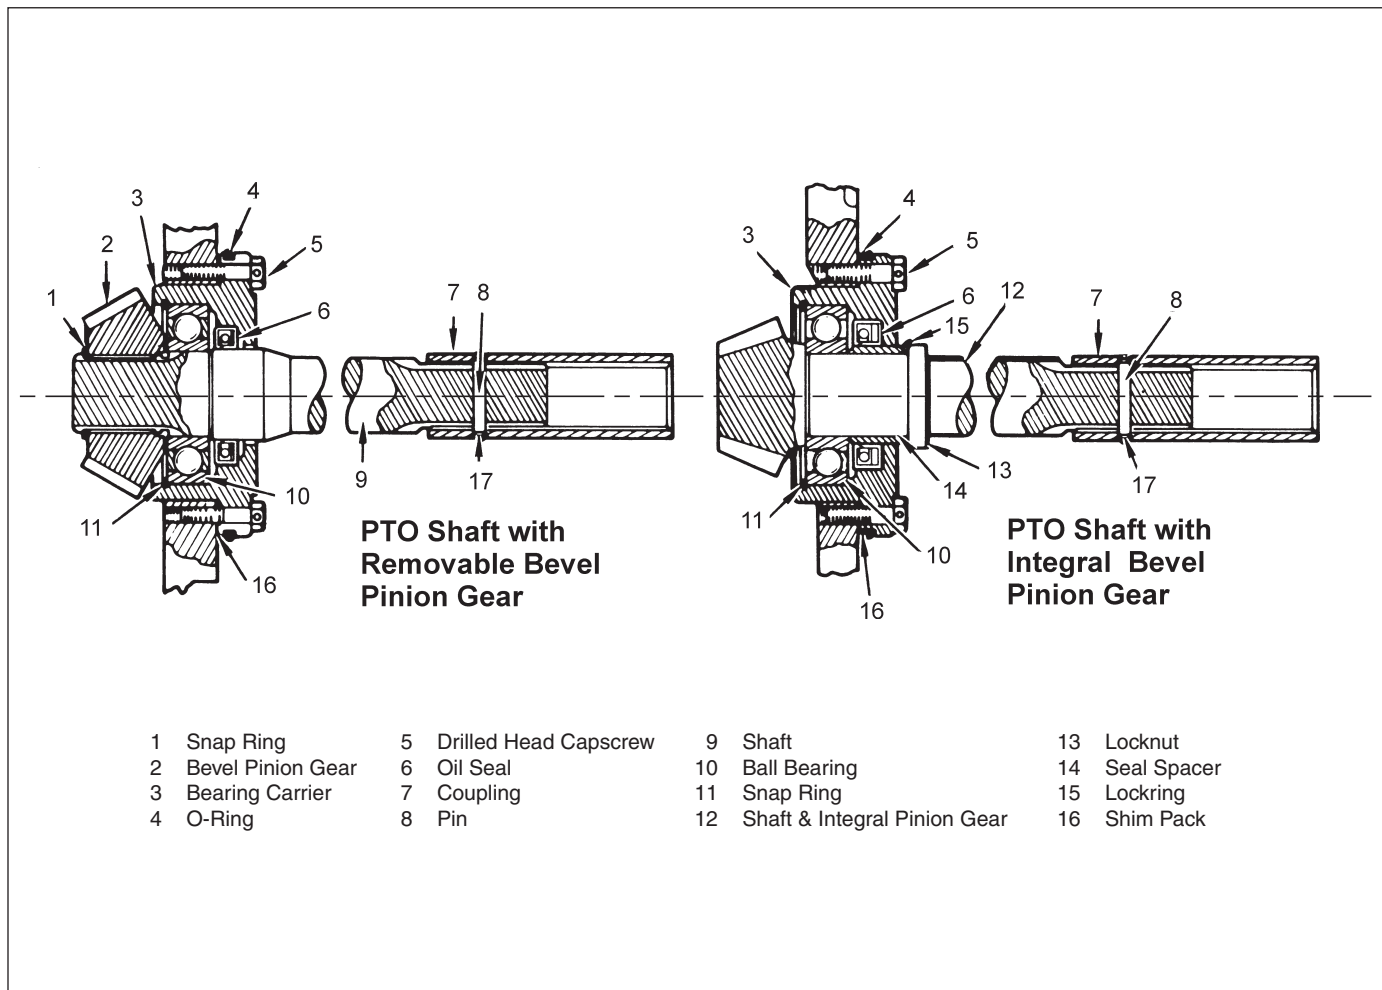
PTO Shafts - Last Used on W6FP-3699, W6FX-3699 & AW6F-1000
